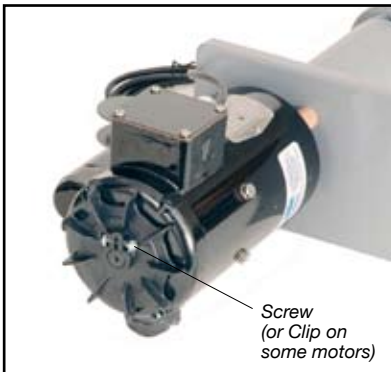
Loosen screw on Fan Blade (or release clip on some motors).
